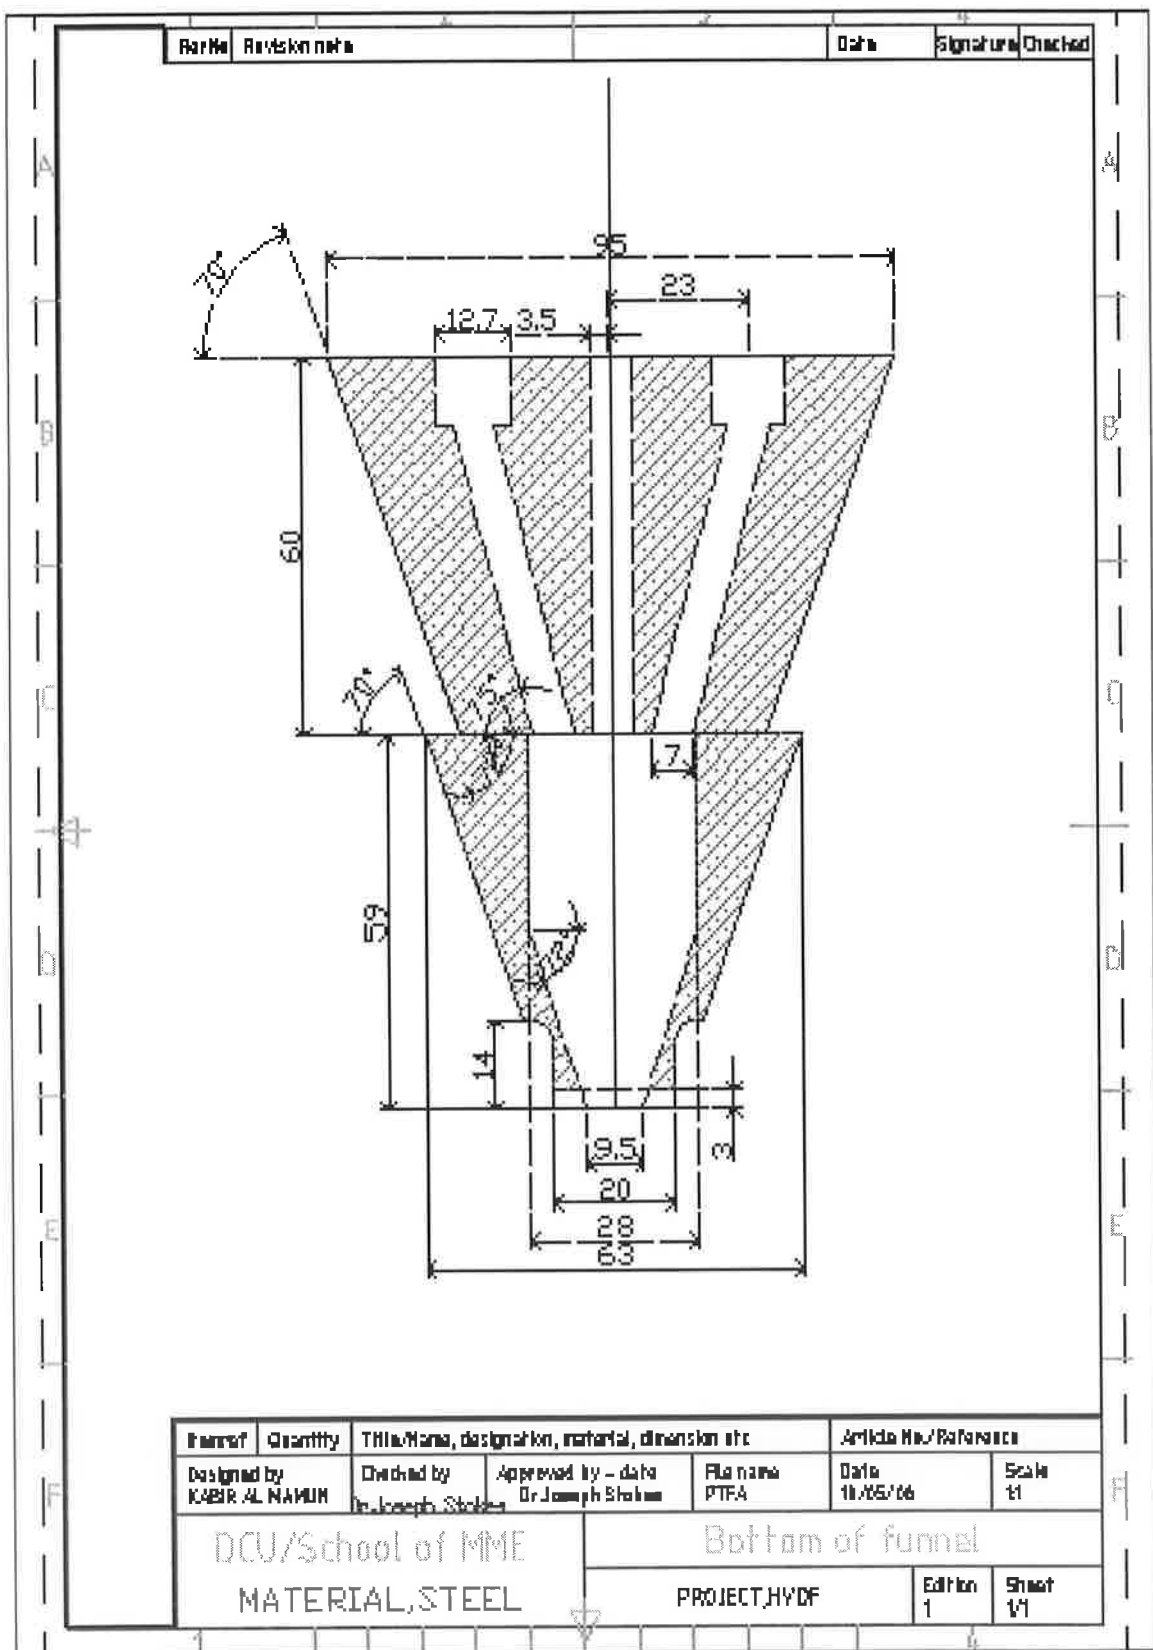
Schematic assembly drawing of the bottom funnel shape design.
